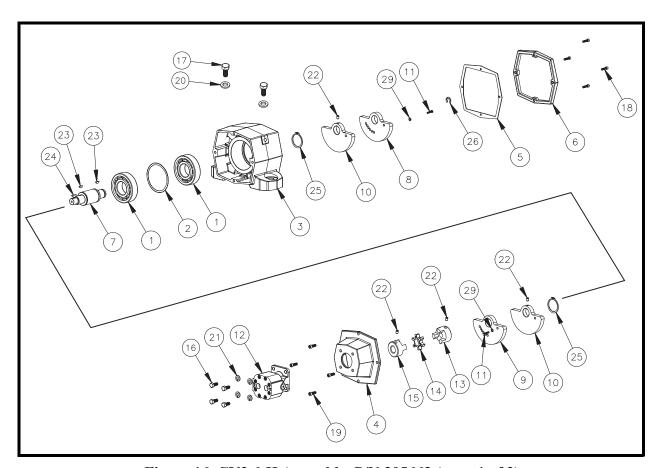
CV2.6-H Assembly, P/N 205663 (page 1 of 2)
